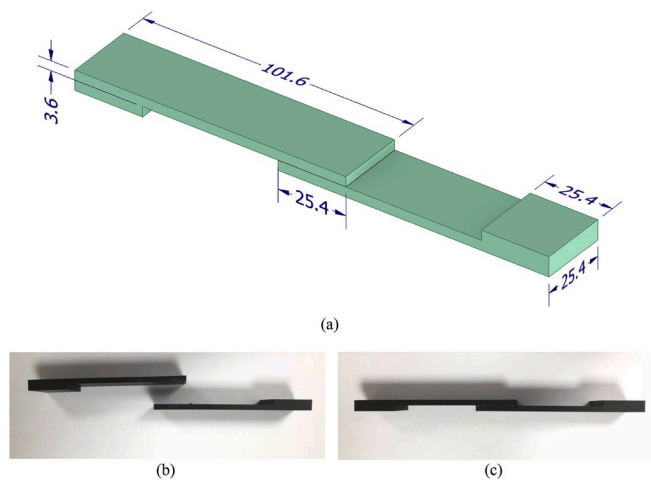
(a) Dimensions of a single lap shear test specimen (unit in mm). (b) Unbonded half of single lap shear test specimen with extra tab printed. (c) Final geometry of specimen after bonding.
